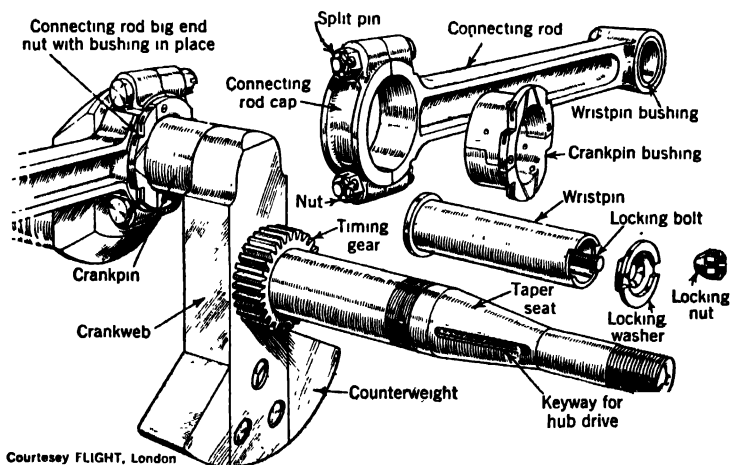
B.—Some Constructional Details Showing Front Portion of Hornet Crankshaft with Special Floating Bush Big End Construction Outlined. Note Also Wristpin Construction Showing Locking Arrangement.
